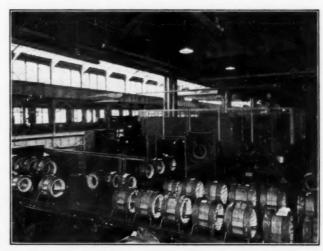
Power-Driven Conveyor Used in Testing Wound Motor Stators
